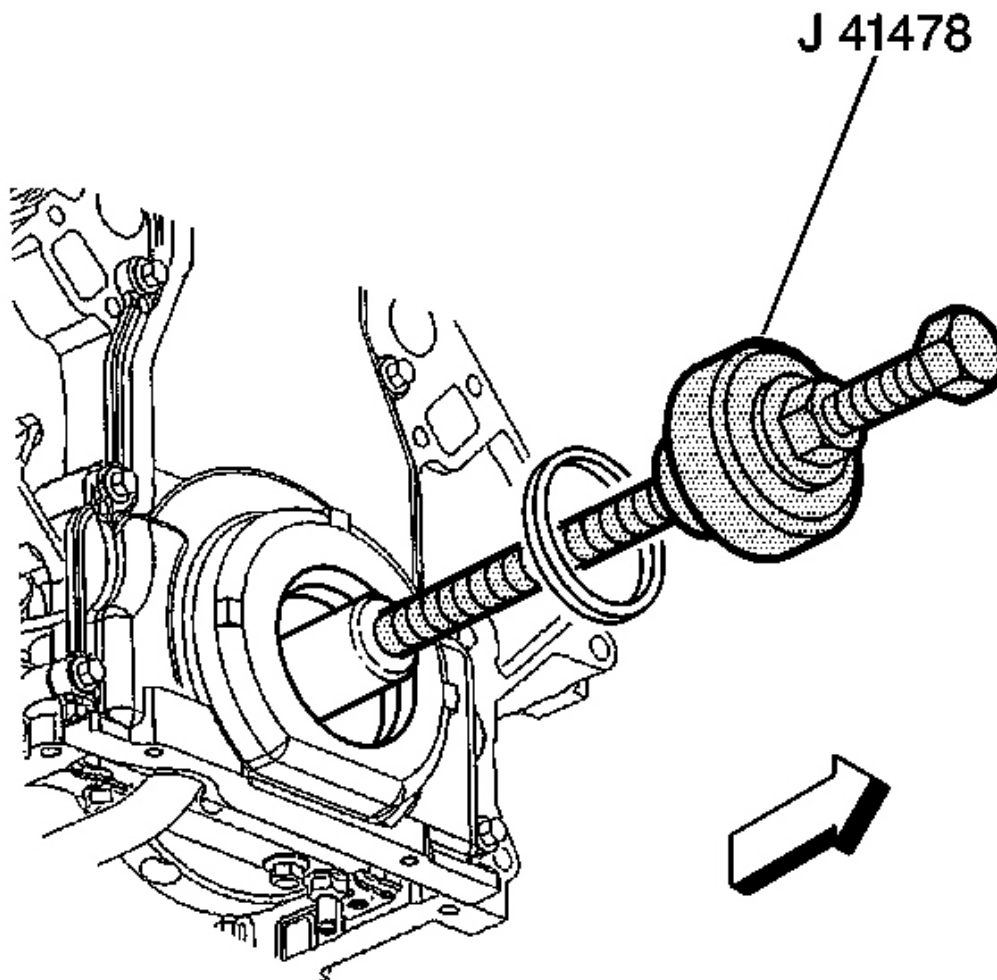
J 41478 & Crankshaft Front Oil Seal
